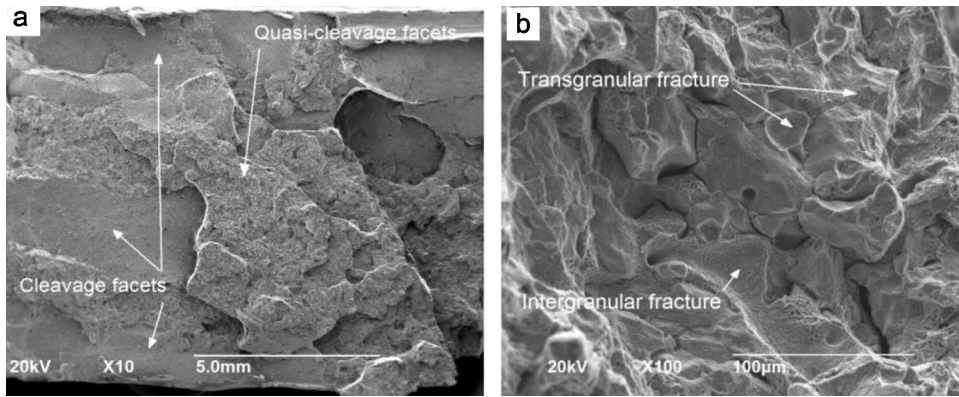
SEM image of original fracture surface of specimen F (a); a local enlarged view in (a), (b).
